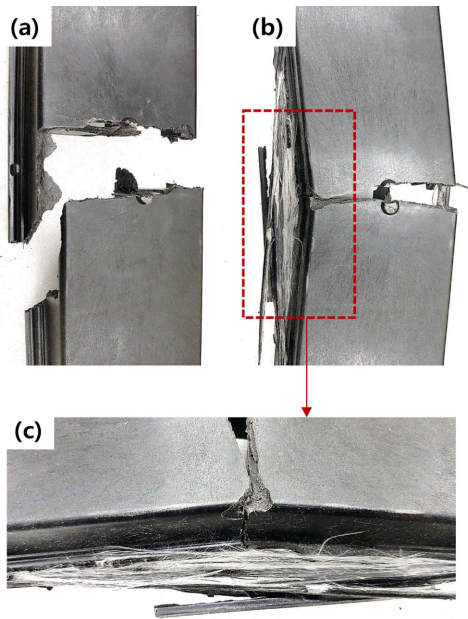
Fracture mode comparison between injection beam and insert-injection beam; (a) injection beam fracture, (b) insert-injection beam fracture, (c) continuous fiber breakage of insert rod
